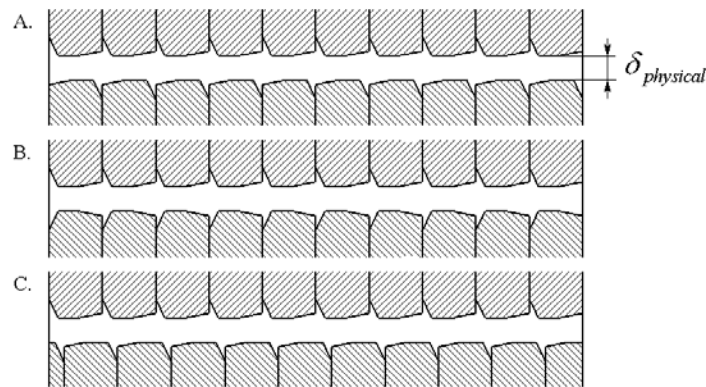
Relative positions of the stator and rotor sheets (thickness 0.65mm) in the air-gap (0.3mm) of the electrical machine.
